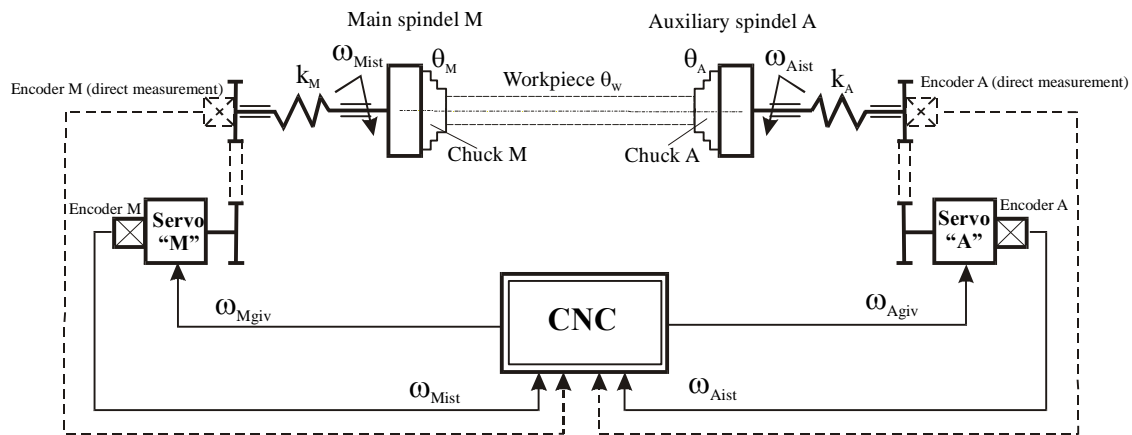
Kinematics scheme of synchronization while reclamping workpiece on CNC lathe
